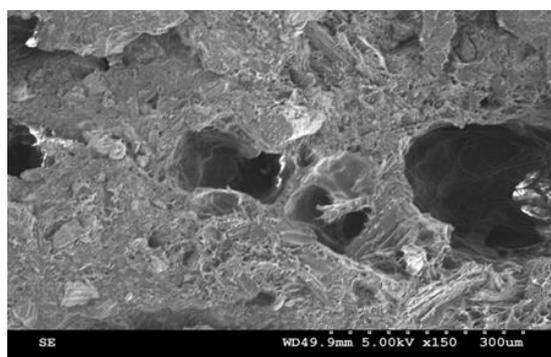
Pores on the fracture surface of an F_3 tensile test sample [16]
